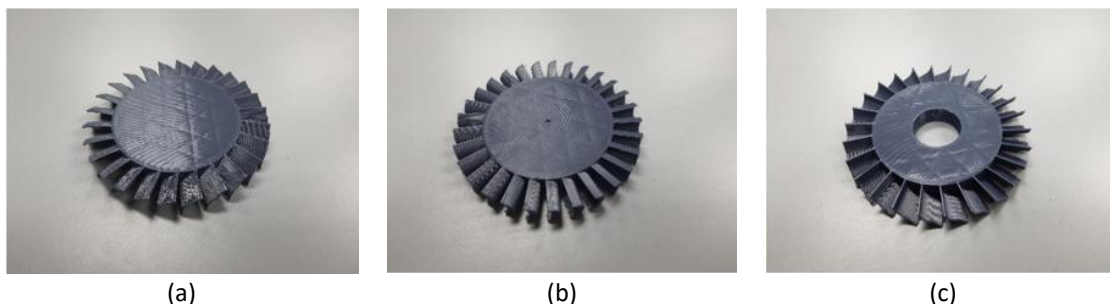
The 3D printed (a) upstream stator, (b) middle rotor, and (c) downstream stator
